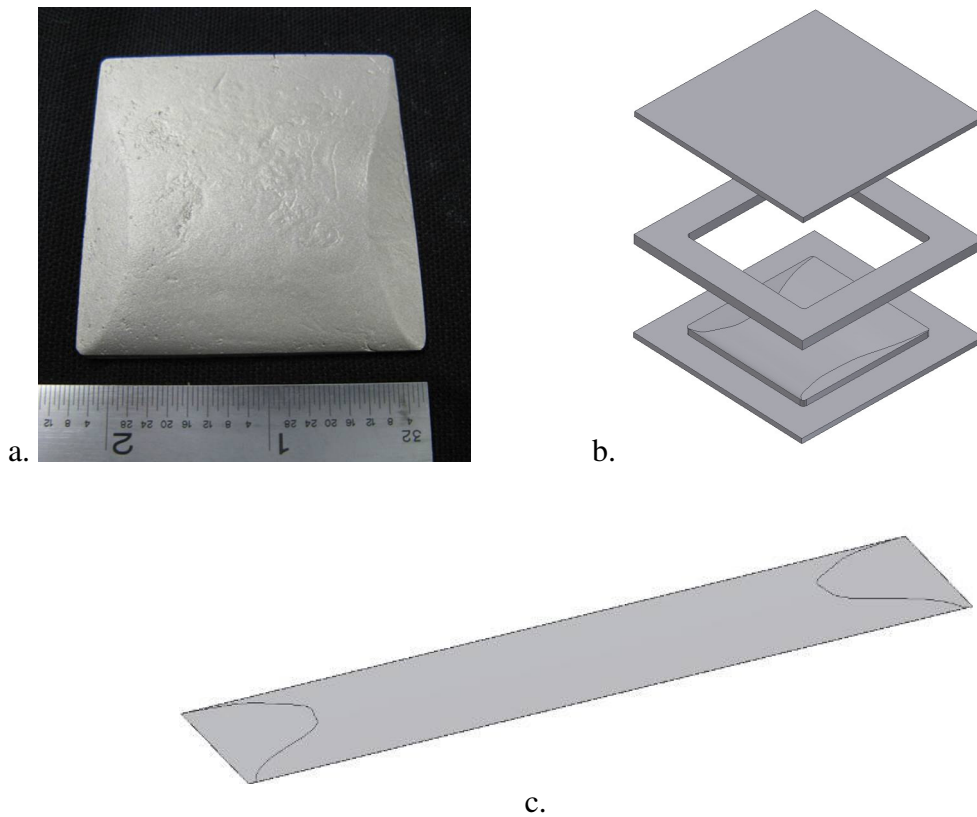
Graded fuel foil fabrication: a) Image of cast, complex geometry, stainless steel coupon/ingot, b) drawing of three piece roll rolling assembly, and c) drawing of resulting full size contoured foil.
